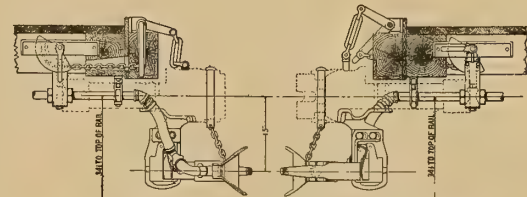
A. ELEVATION OF FREIGHT EQUIPMENT.
